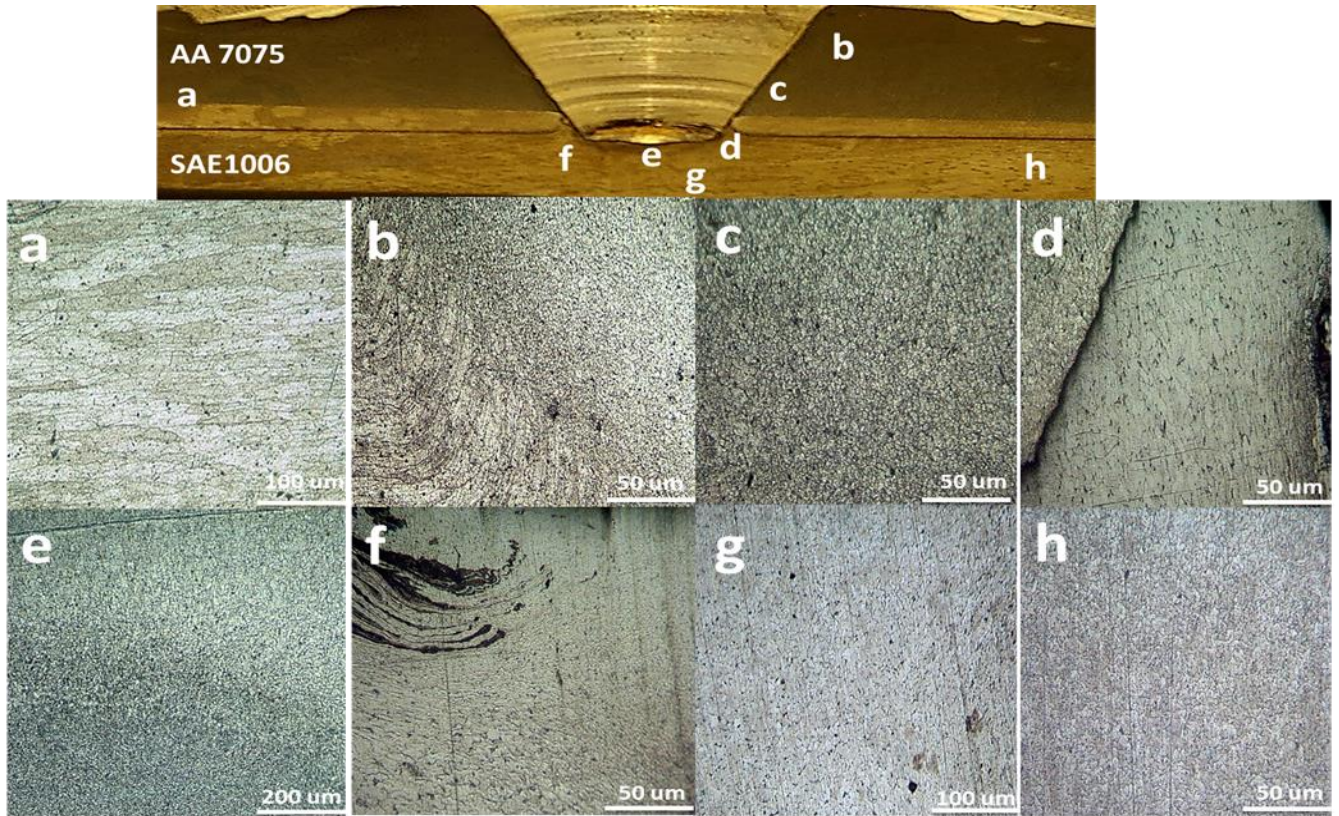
Microstructural at different weld region at dwell time 17sec and long pin length: a) base metal (BM) of AA 7075, b) stir zone (SZ) and HAZ zone, c) Stir zone, d) Right to Center Weld Zone (RCWZ), e. Center weld zone (CWZ), f. Left to the Center weld zone (LCWZ), g) and h) the base metal ASI 1006
